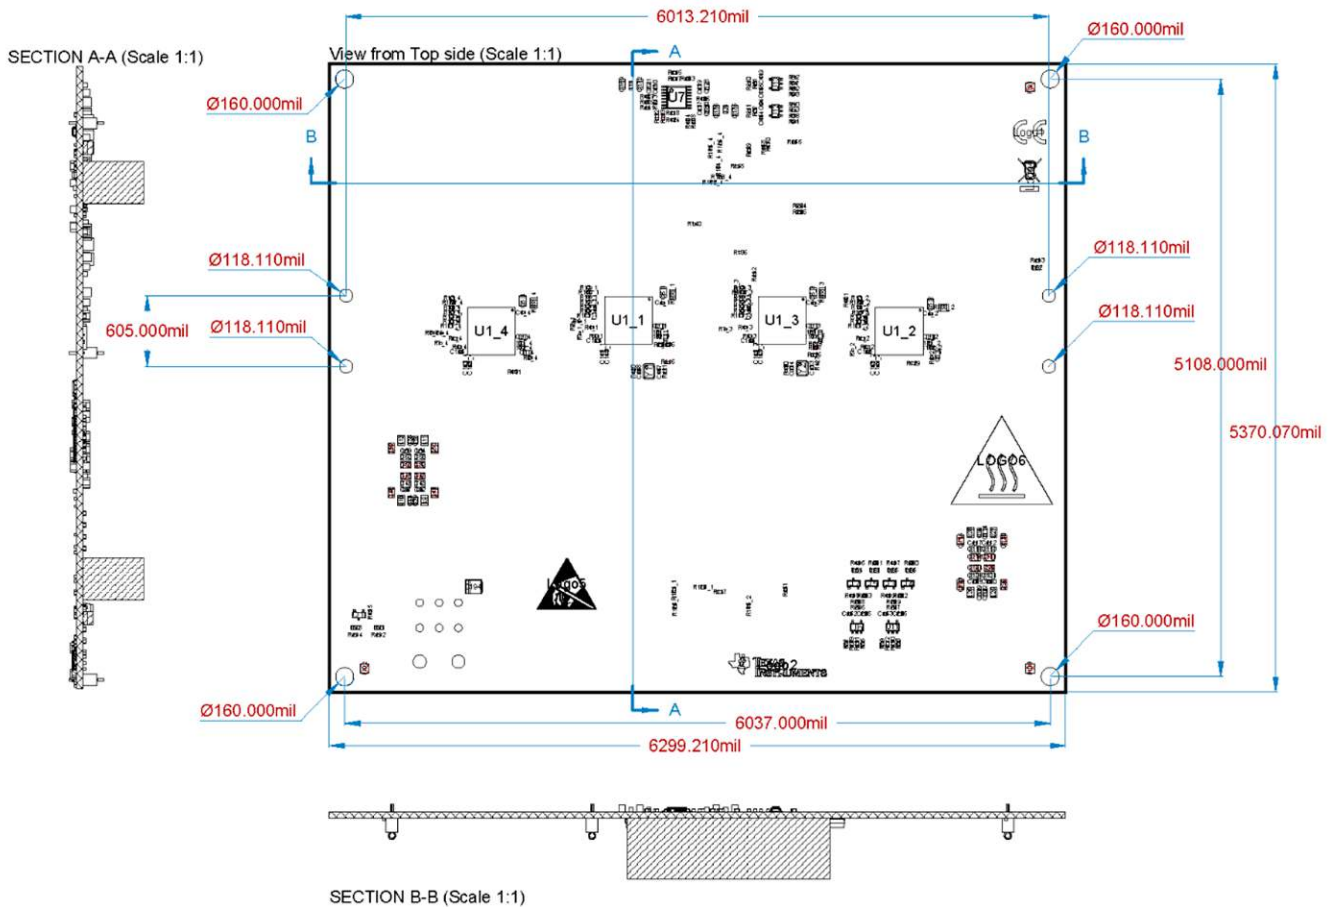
MMWCAS-RF-EVM Overall Mechanical Dimensions and Mounting Drill Dimensions
